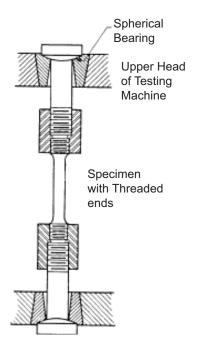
Example of a Gripping Device Devoted to Threaded-end Specimens
